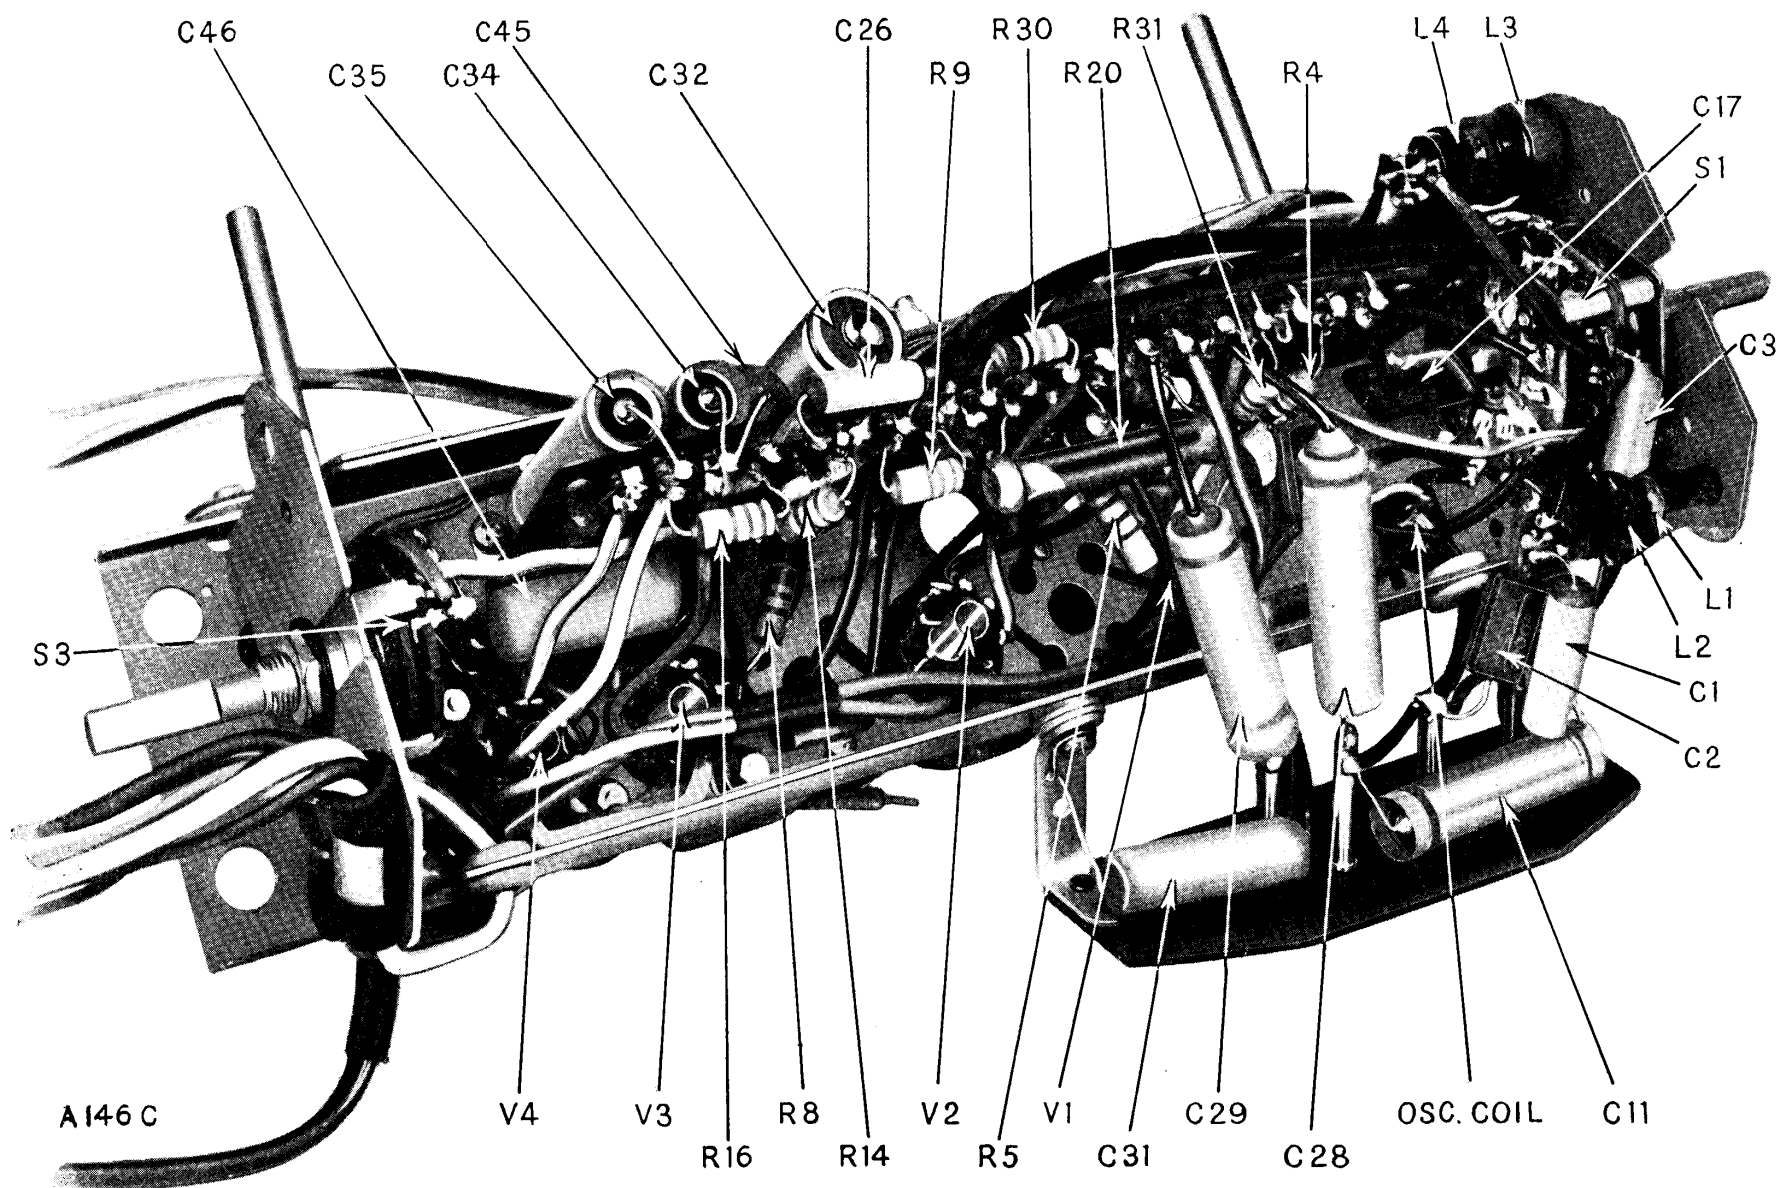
Underneath view of the Receiver Chassis. The top view is on page 12.
